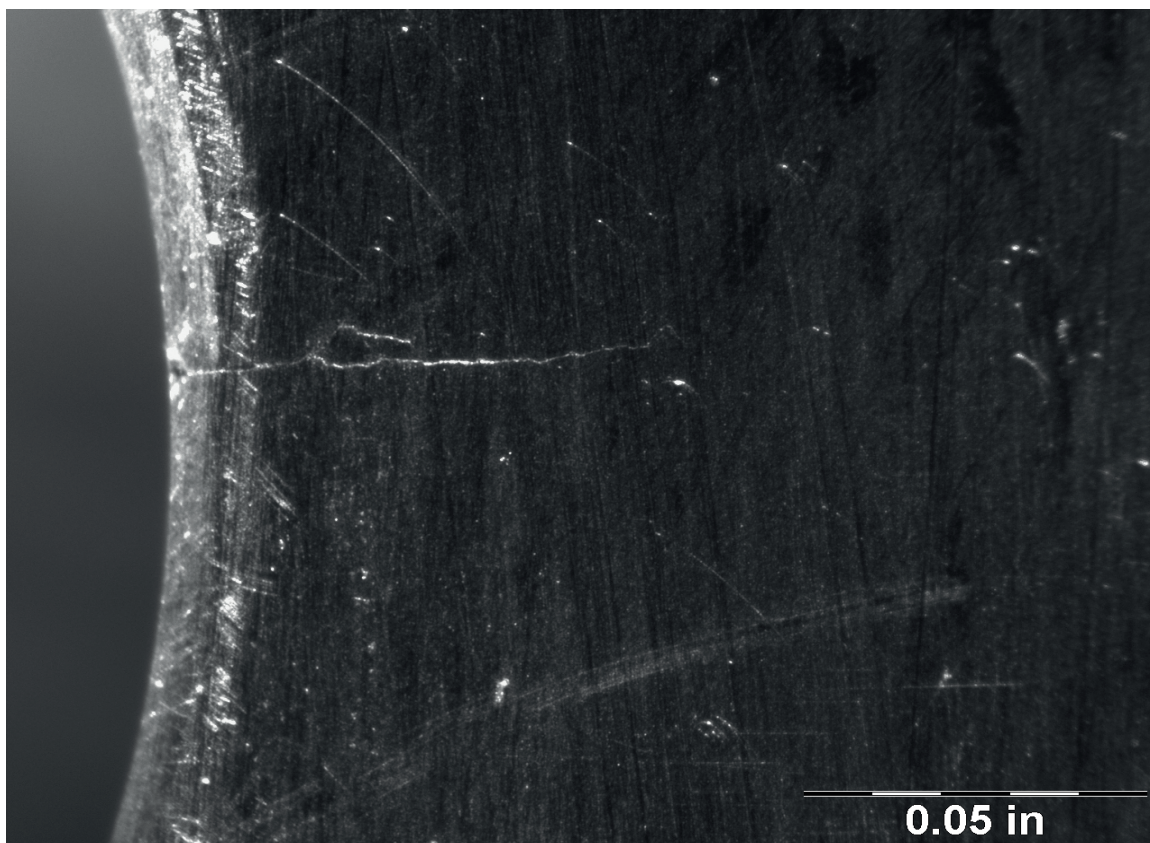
Image of Surface Crack in Coupon Cx4N1-02-D, Surface Crack Length is 0.0807 inch.
